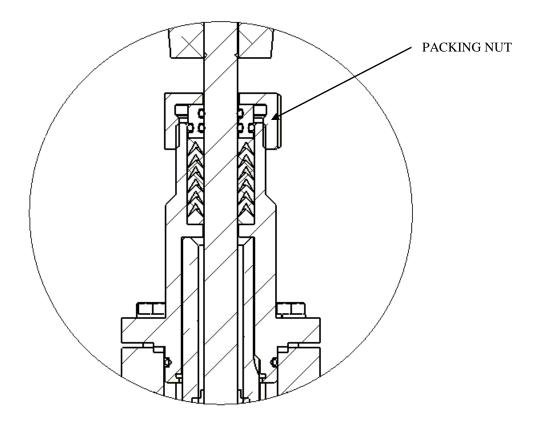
Standard Packing Nut (PTFE Packing Shown)
